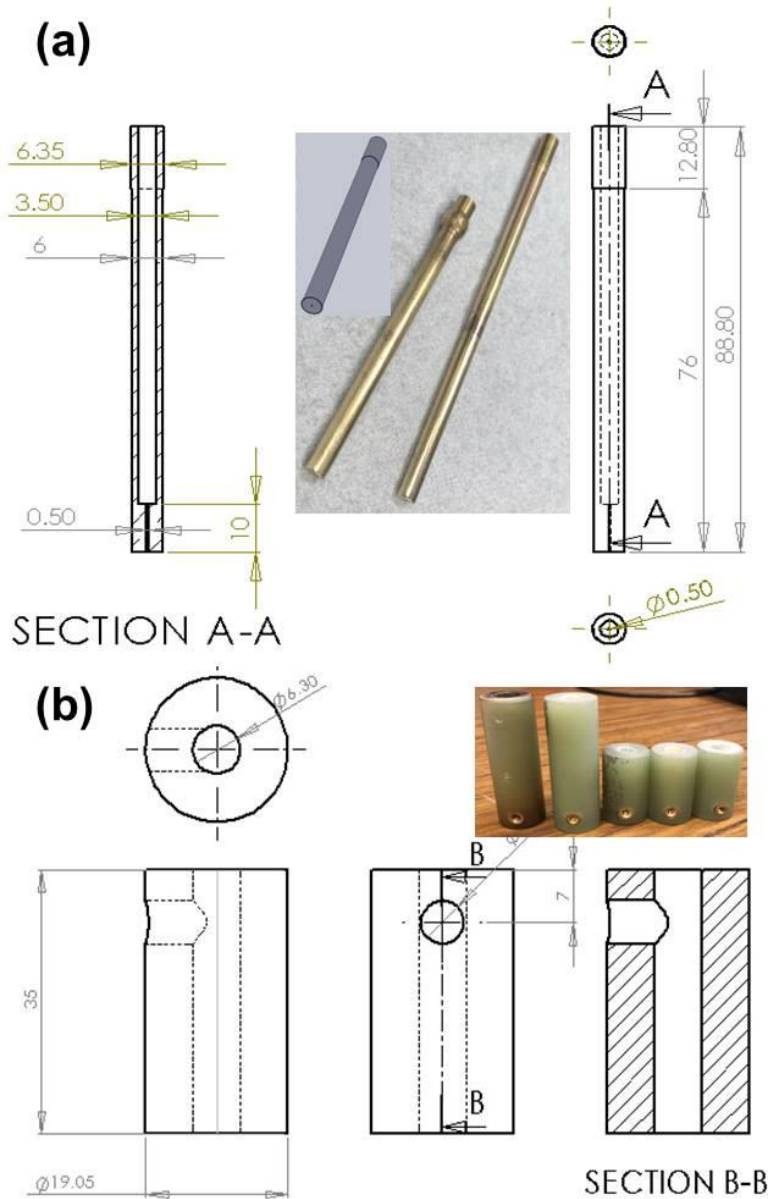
The machine schematics for (a) the brass rod cathode and (b) the cathode insulator. The scale units on the schematics are presented in mm. The parts demonstrated in this picture were machined in LSA Scientific Machine Shop at University of Michigan.
